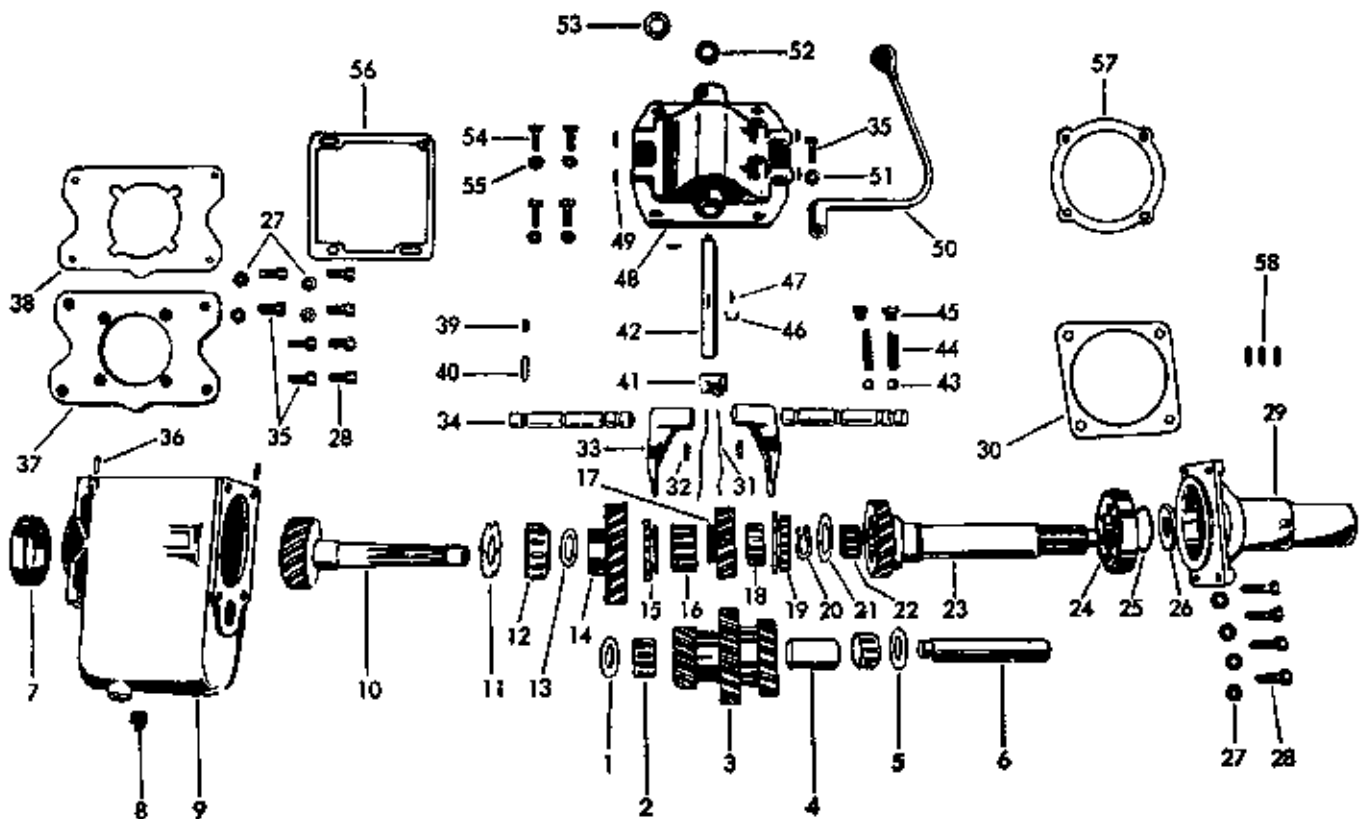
Exploded view of the Sherman transmission showing the component parts.
